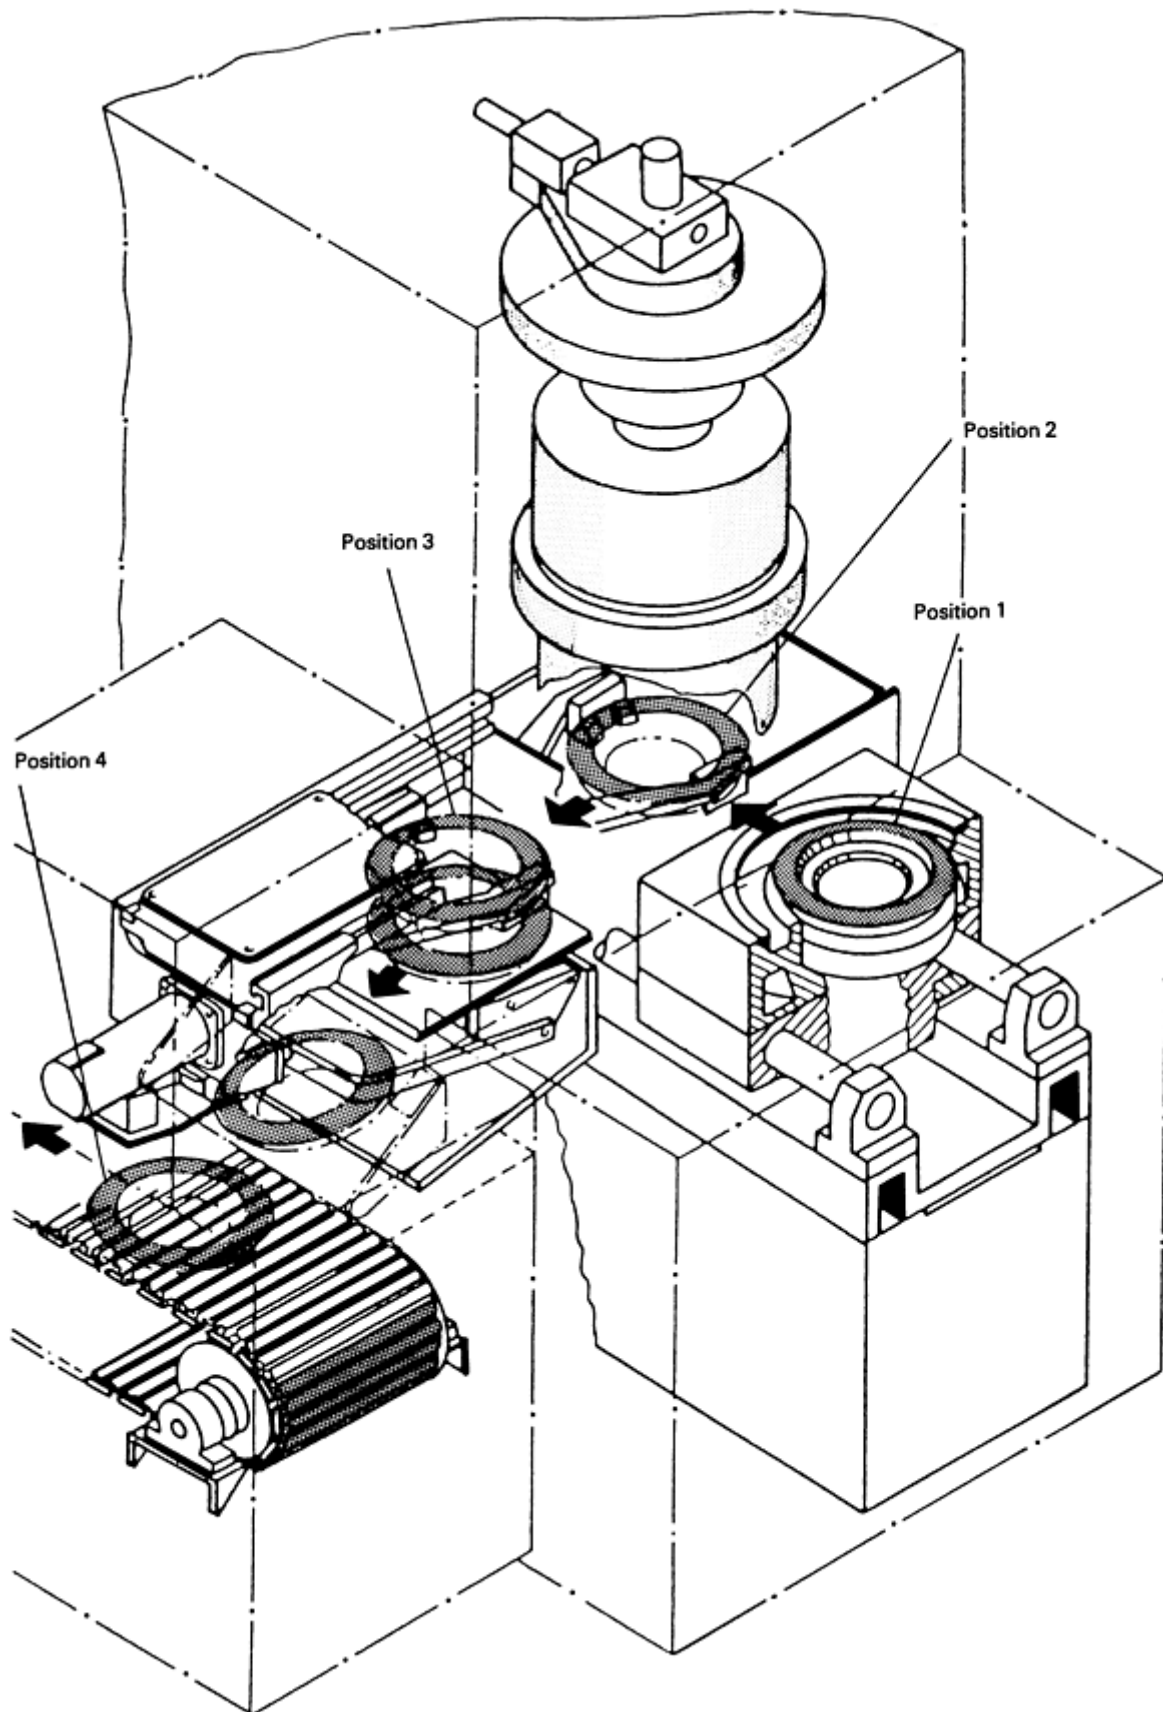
Cutaway view of a four-position, automatic gear-quenching press using the pulsing principle. Hot gear placed in extended lower die (position 1) is transferred to the center of the quench chamber containing the upper die, the chamber is sealed, and the workpiece subjected to the intermittent pressure of flowing oil for 20 s (position 2). Quench chamber door opens as die is raised and workpiece is moved into an auxiliary quench chamber (position 3) that is subsequently also sealed to provide further cooling while submerged in oil.
